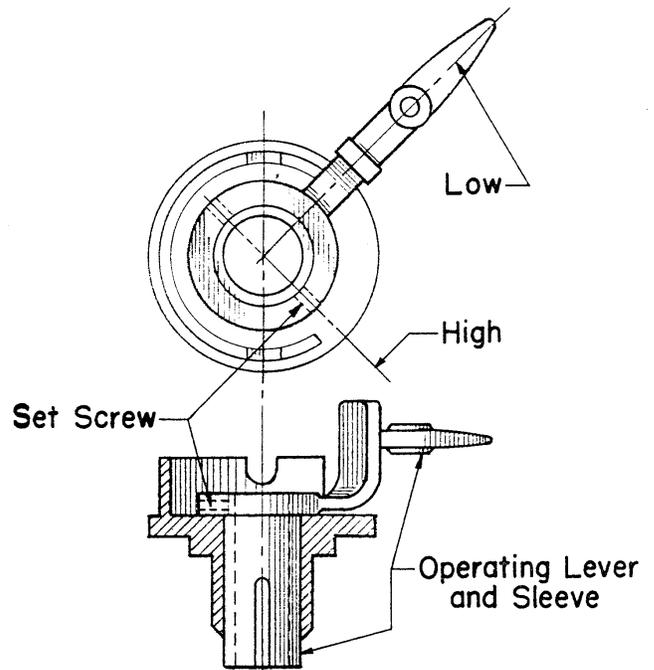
Drawing of the air nozzle control lever showing the set screw locations.
